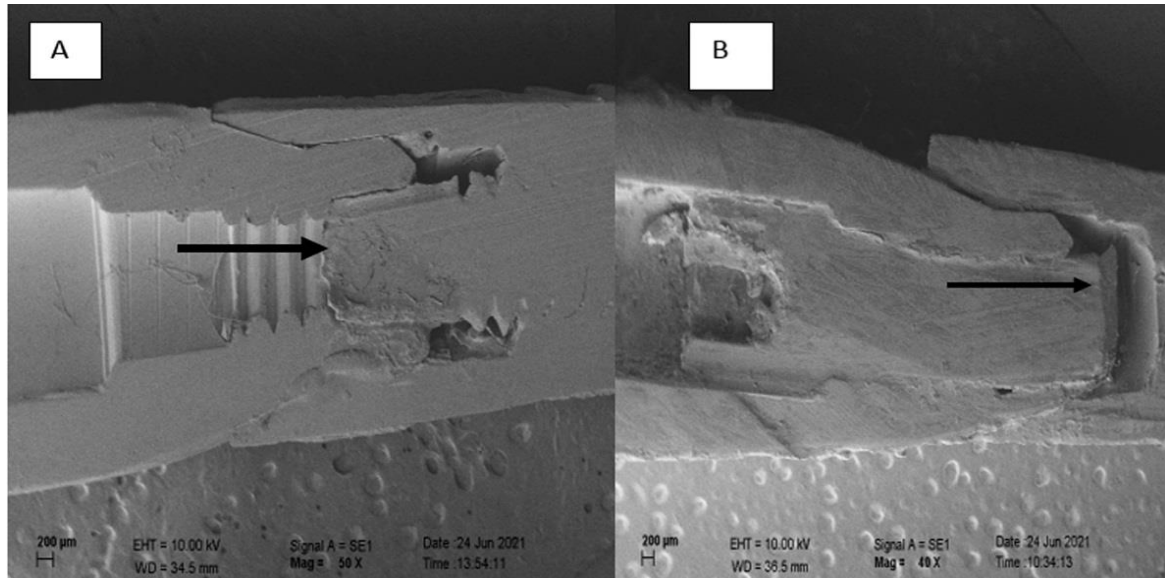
SEM fractography of longitudinal section of hole implant specimen: a) upper part screw fracture, b) lower part screw fracture (magnification 50X).
